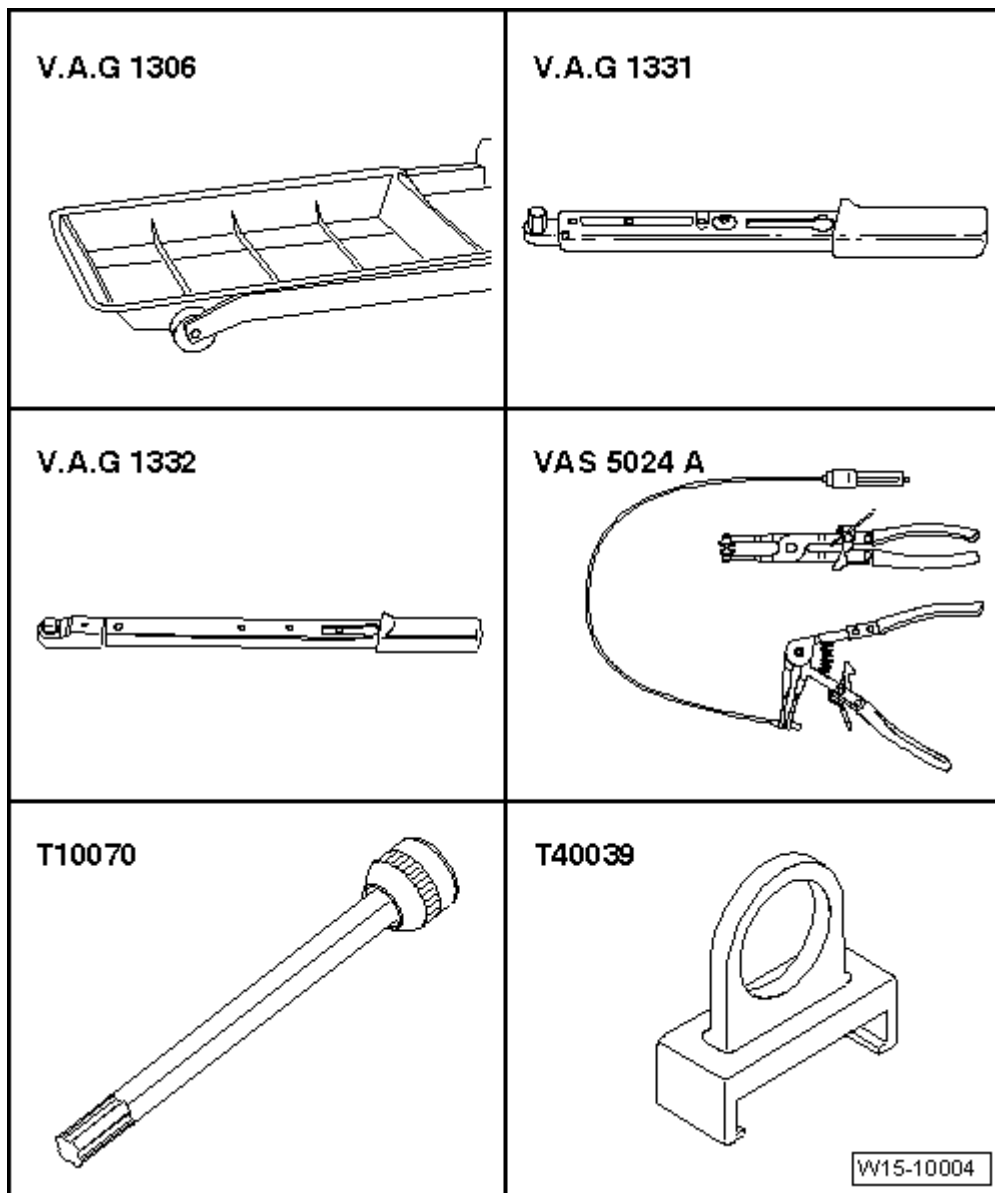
Identifying Special Tools -- Cylinder Head, Removing And Installing
